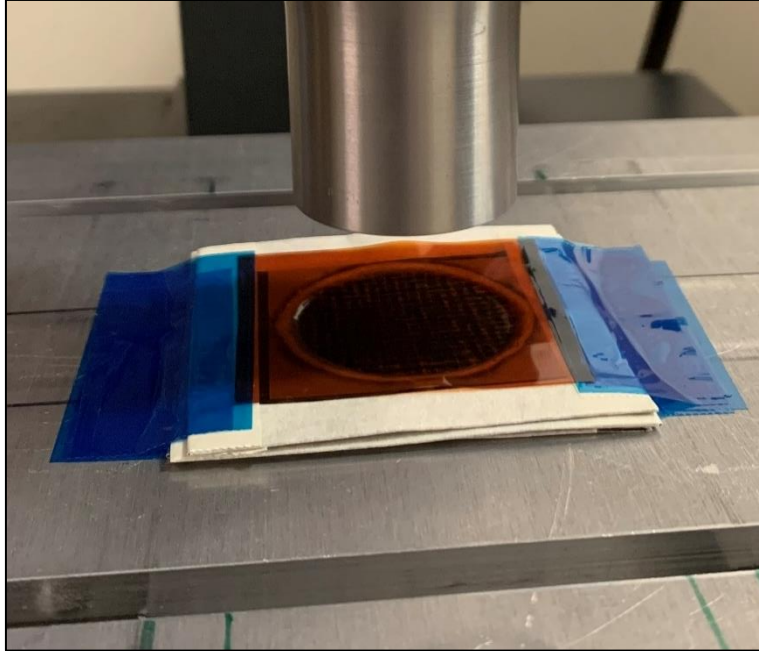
CF/PPS specimen post-consolidation on weld platform.
